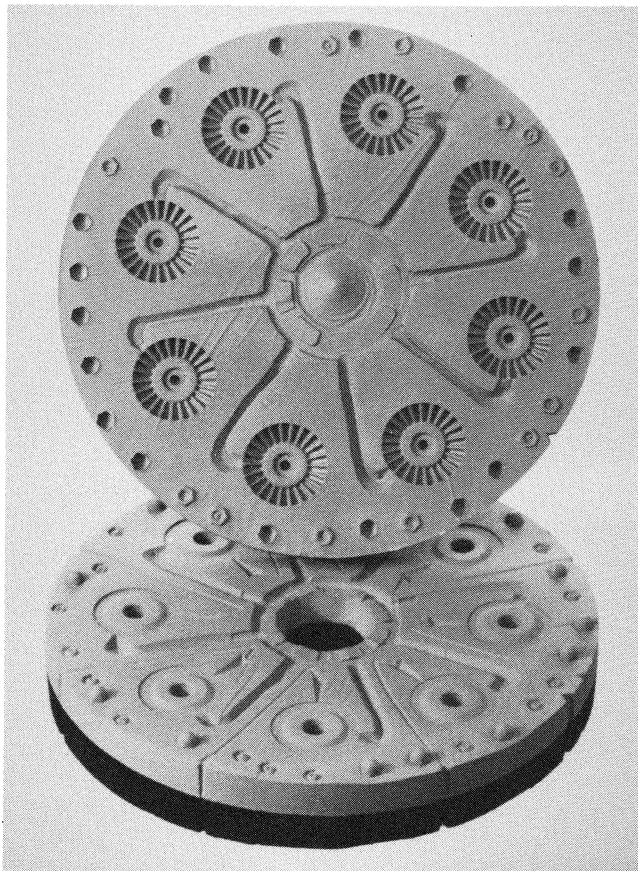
This 8 cavity tool was used to produce the castings shown in Figure 1. Note the holes and buttons located around the outside perimeter of the mold. They are used to keep the mold aligned during casting.
